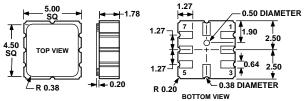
8-Terminal Ceramic Leadless Chip Carrier [LCC] (E-8) Dimensions shown in millimeters
